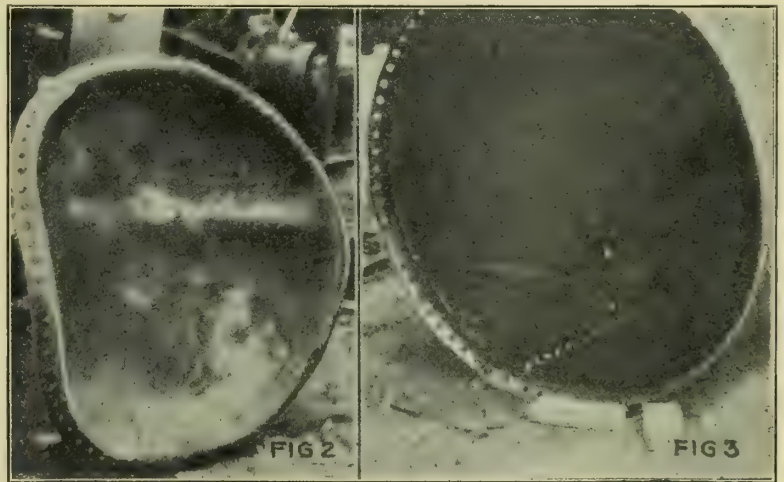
INSIDE FACE OF HEAD AFTER EXPLOSION. FIG. 3.—SHOWING FLARING END OF SHELL WITH RIVETS PULLED OUT.
